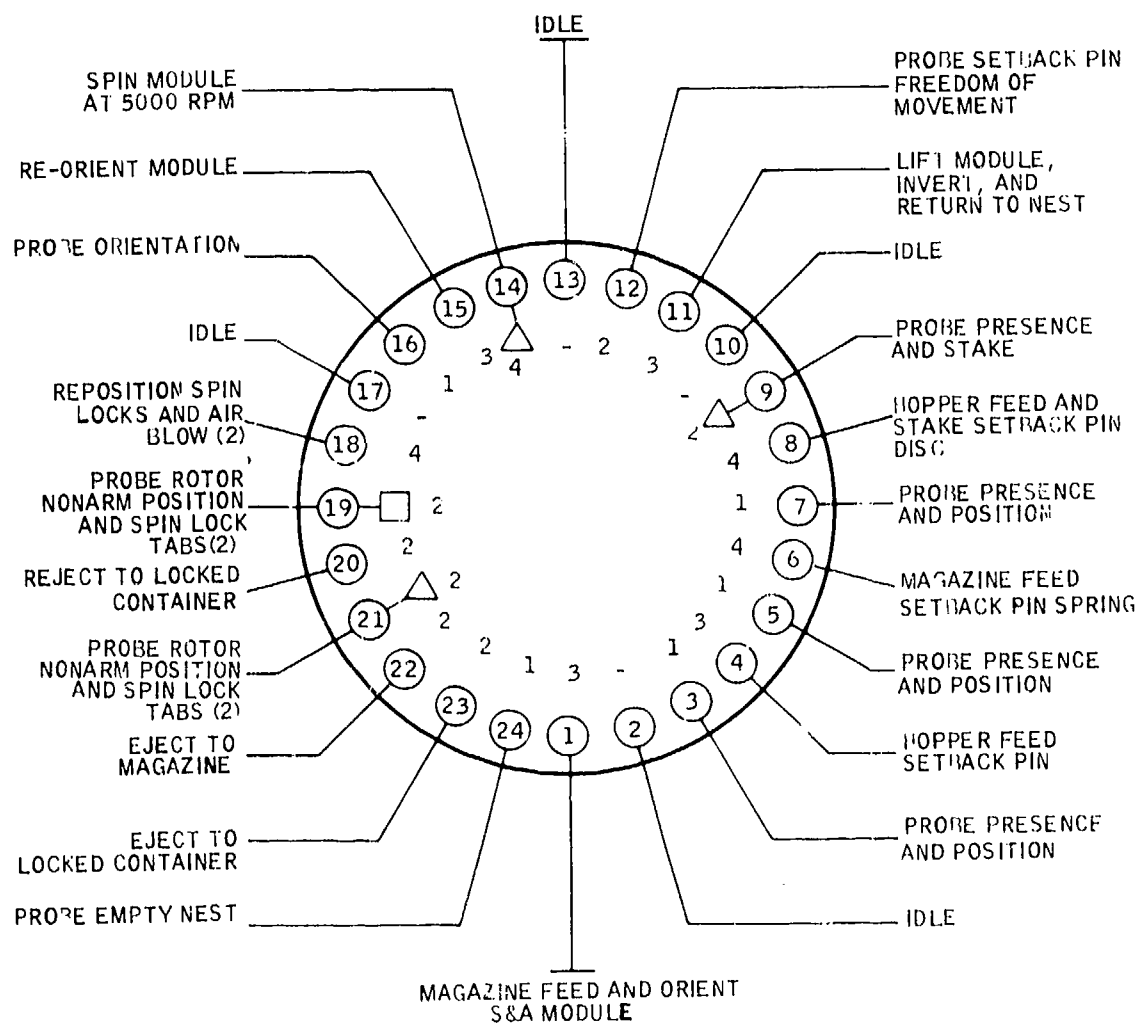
Dial schematic, machine S10 - S&A module assembly operation 2 (setback pin)
